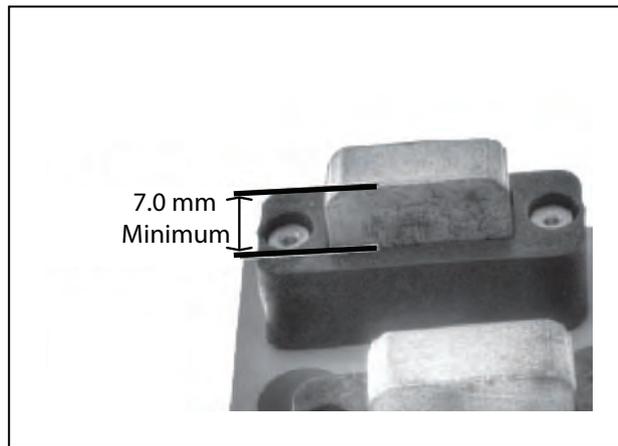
Inspecting the Charging Contacts for Signs of Wear
